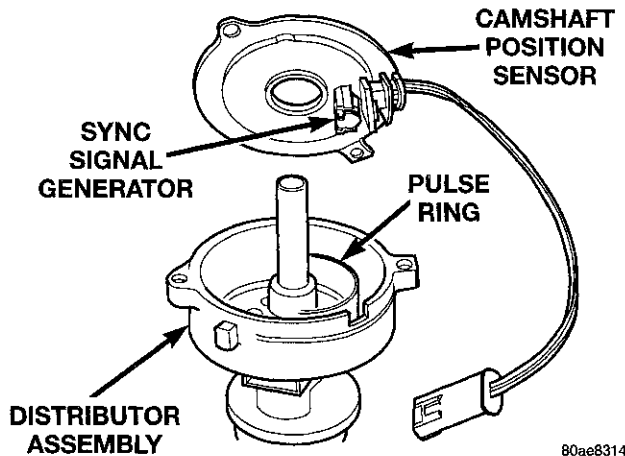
Distributor and Camshaft Position Sensor—Typical
